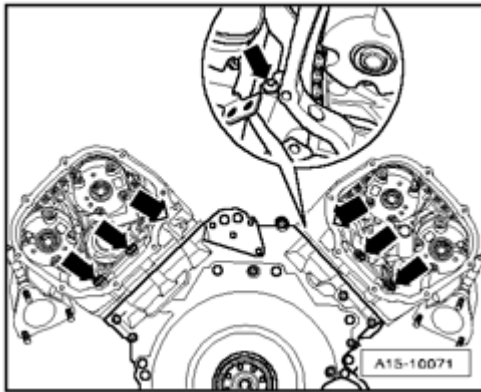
Removing Bolts At Rear Of Cylinder Head
